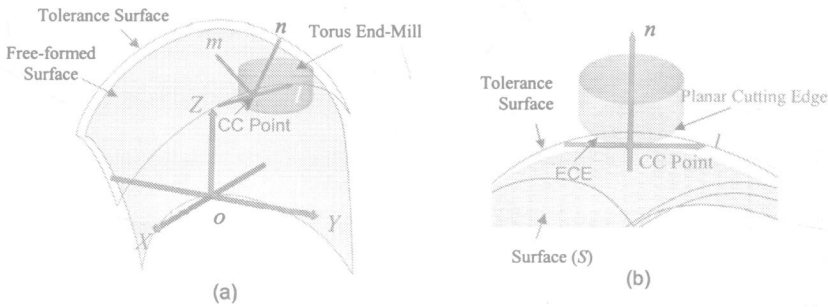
Diagram of Effective Cutting Edge (a) a Cutter Milling a Surface, (b) Projection of the Cutter on Plane (l-n) along Tool Feed Direction (m)
